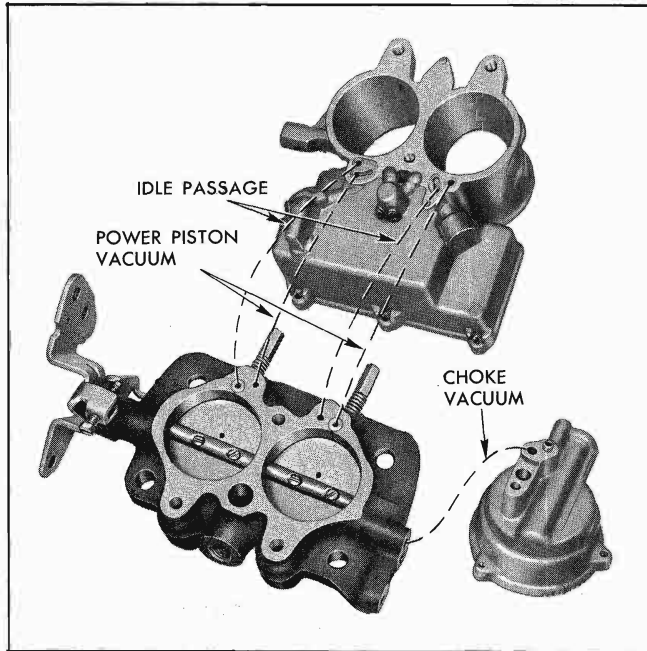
B-27 Passage Identification—Flange—Bowl—Choke Housing
